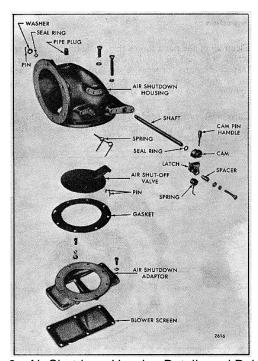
Air Shutdown Housing Details and Relative Location of Parts
